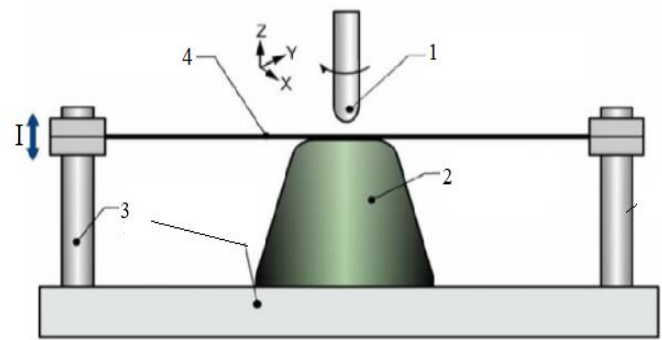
Incremental two-point forming with ball tip tool and partial die, [13]: 1 – main tool; 2 – specific support; 3 – fixture; 4 – semi-finished; I – tool penetration movement in the direction of the Z axis
